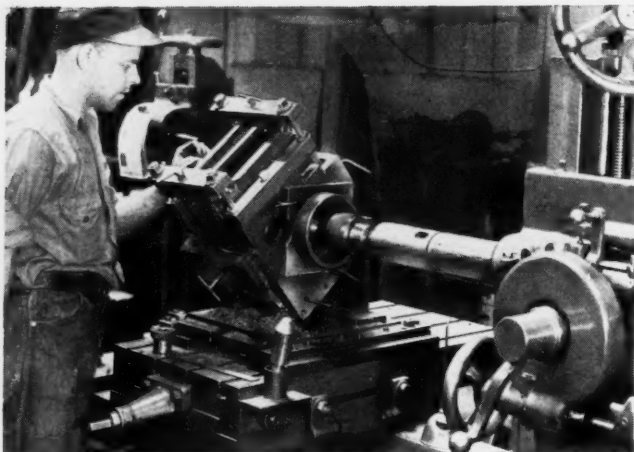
Line boring and reaming hole in pinion shaft and gear shaft of shaper. Tilted position of fixture simplifies accurate positioning of hole
